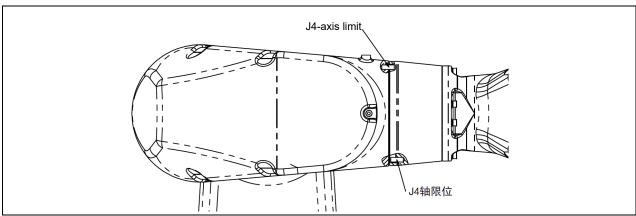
J4 Axis brake position (ER10-900-MI/HI)
